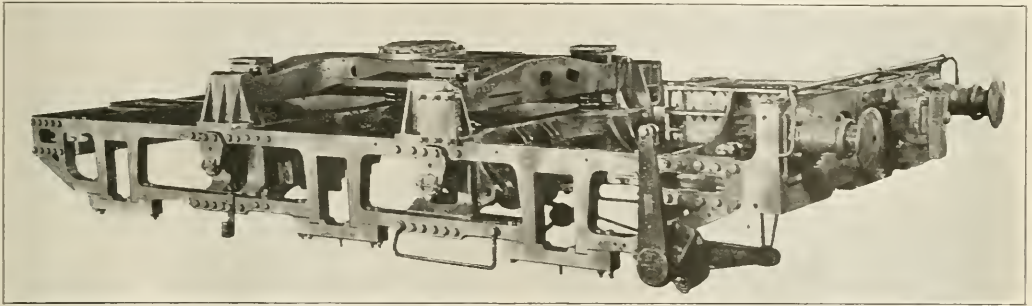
Main Truck Frames with Cross-Ties, Bumper Beams and Truck Bolster All Assembled
